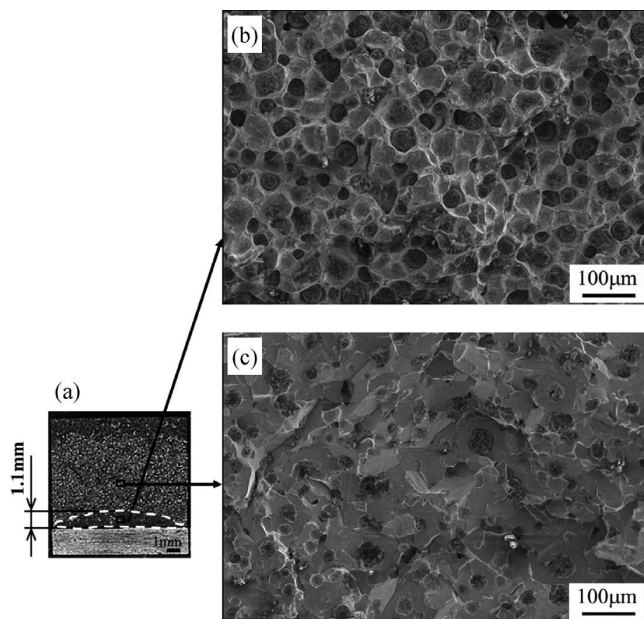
Fracture surface of specimen at $\dot{\epsilon}=72.3 \times 10^{-2} s^{-1}$ (a) and the high magnified images of ductile fracture area (b) and brittle fracture area (c).
